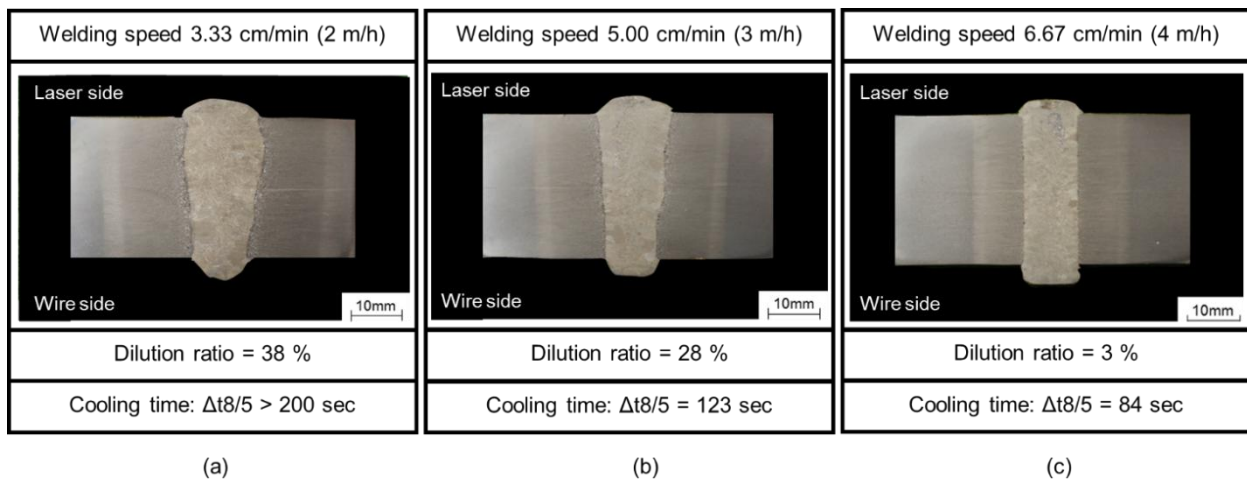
Horizontal cross sections of welding speeds of (a) 3.33, (b) 5.00 and (c) 6.67 cm/min.
